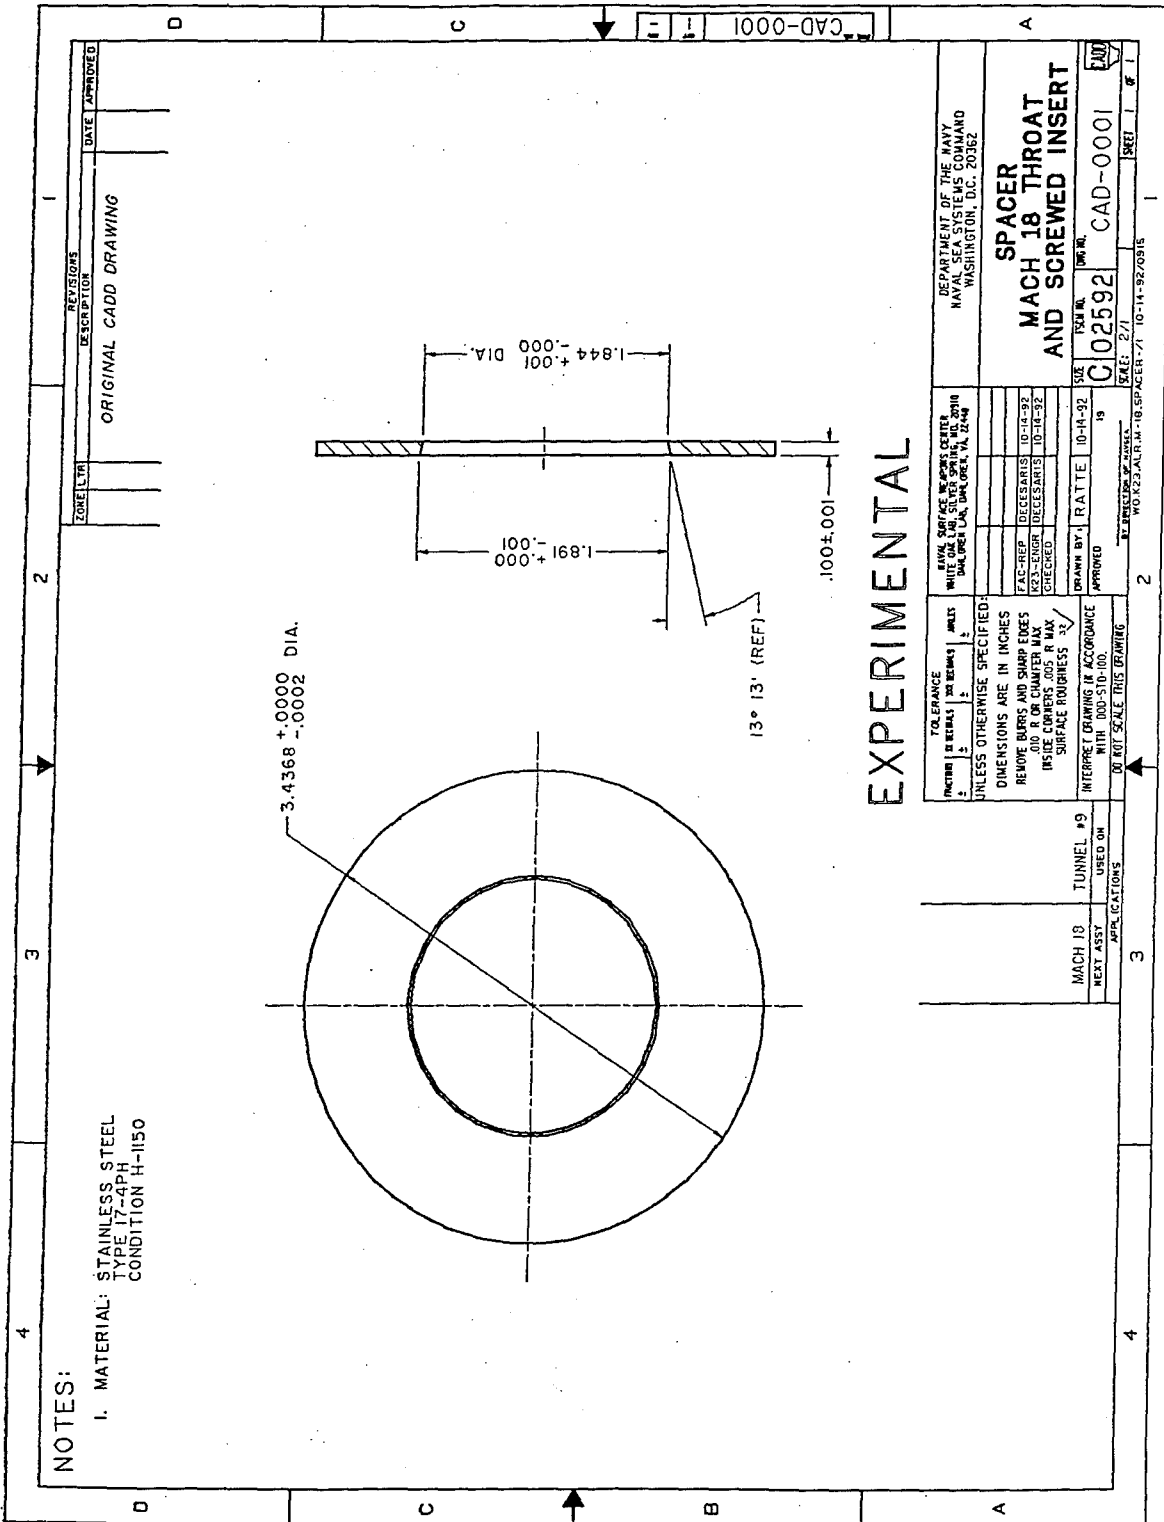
MACH 18 STEP INSERT HARDWARE
